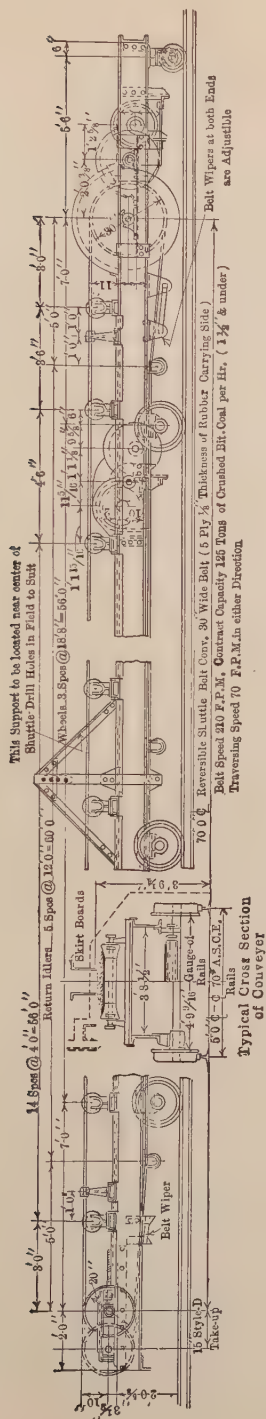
Side View and Cross-section of Shuttle Conveyor Shown in Fig. 169.
